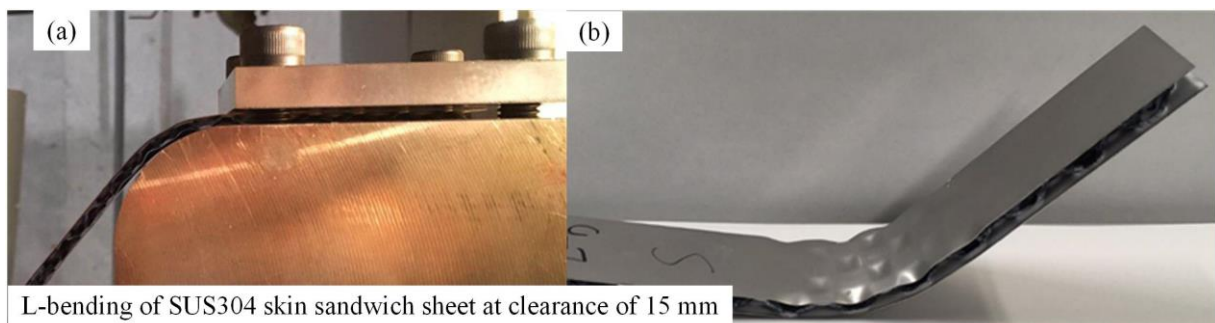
L-bending of sandwich sheet with SUS304 faces at clearance of 15 mm.
